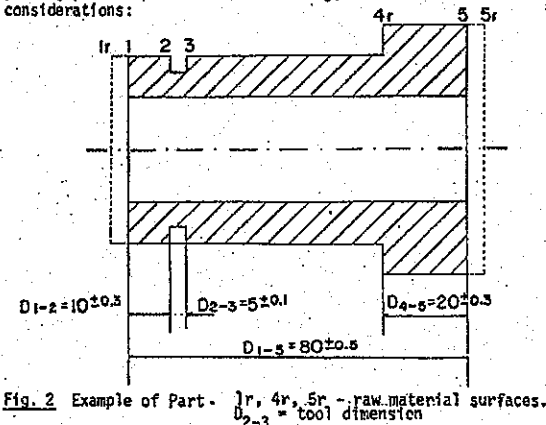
Example of Part. 1r, 4r, 5r -- raw material surfaces. D2-3 = tool dimension
